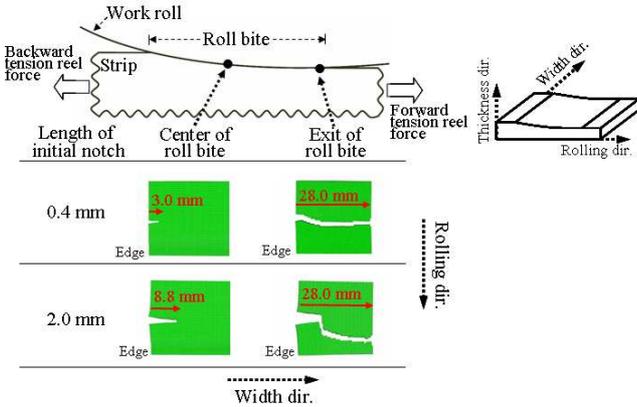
Edge fracture of electrical steel strip at roll bite during cold rolling when the forward tension reel force is 584kN
